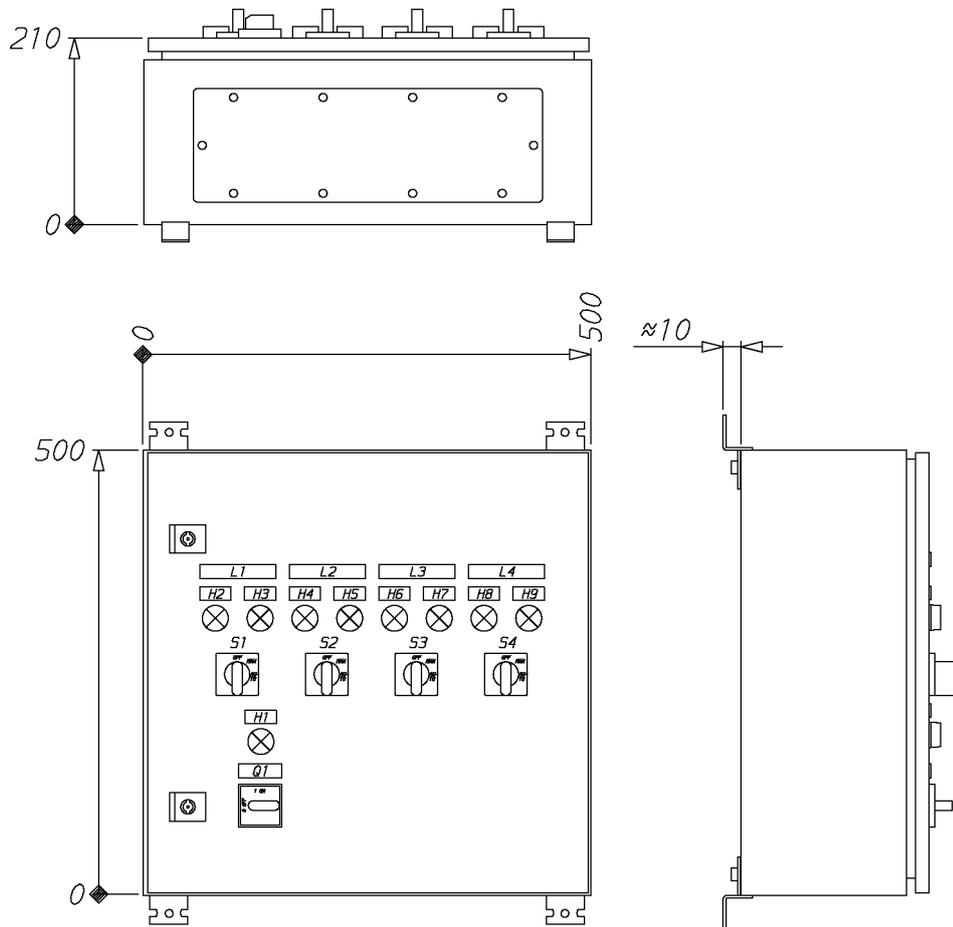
Pre-lubricating pump starter (DAAE005967A)
